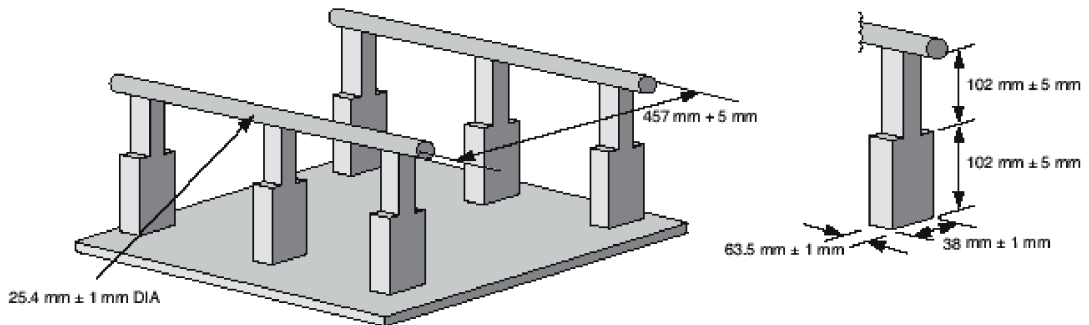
An example of a rigid test fixture to simulate a wheelchair frame
